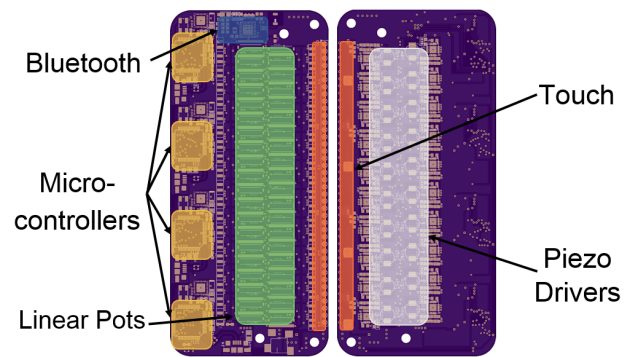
Layout of the circuitry on the custom four-layer PCB board
